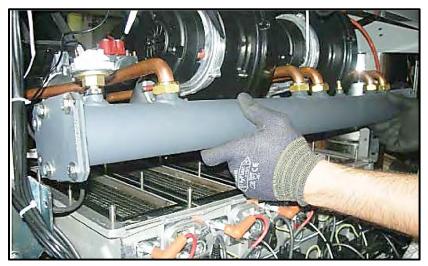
Lifting Burner Assembly from Front (Step 15)
